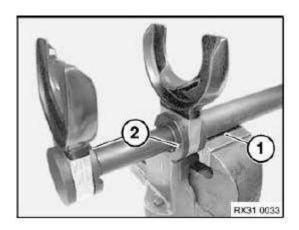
Identifying Lock Pins And Guide Courtesy of BMW OF NORTH AMERICA, INC.
